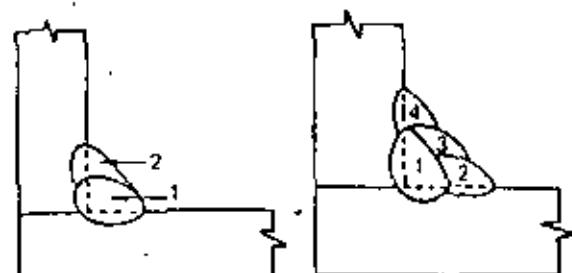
Technique for multi-pass horizontal fillet welds with fast-fill electrodes. Beads should be deposited in the order indicated.
